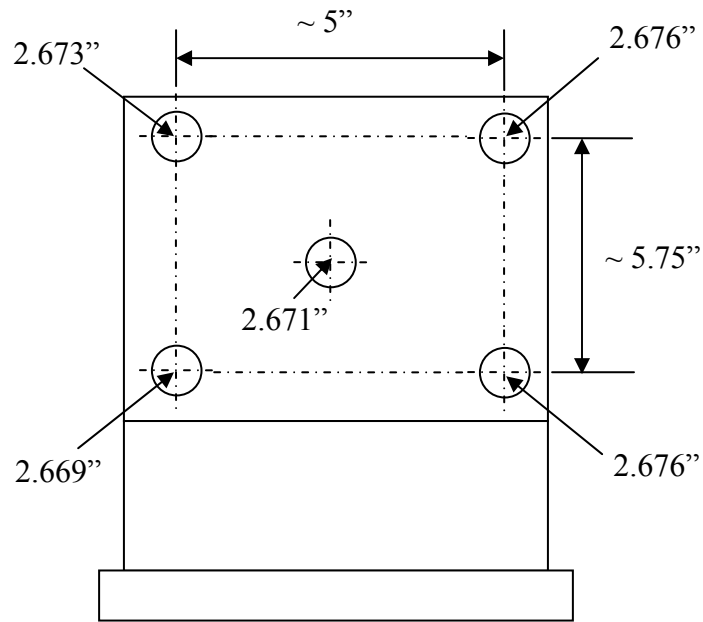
Top view sketch of plate holder measurements recorded for determining flatness of plate holder piece.
